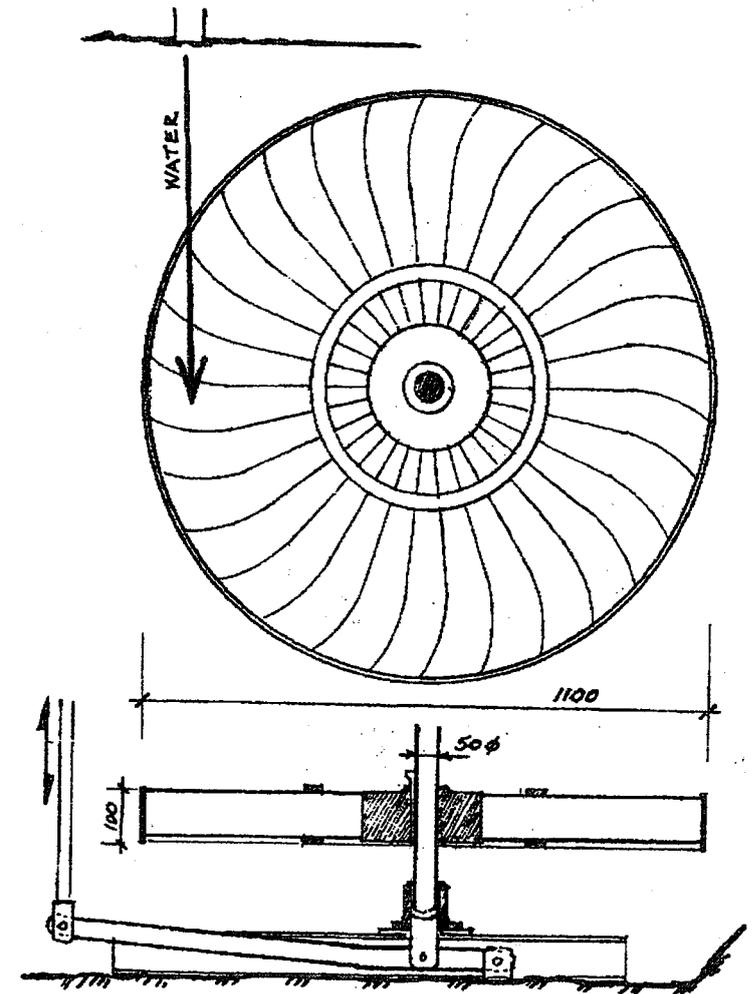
Plan & cross-section of metal waterwheel at Zaros.
